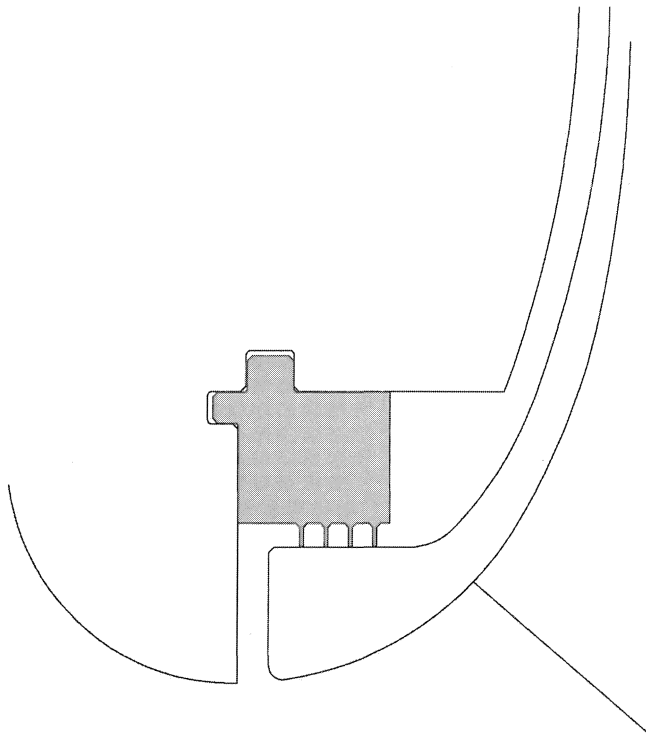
Impeller Eye Seal with Stationary Labyrinth Teeth.
